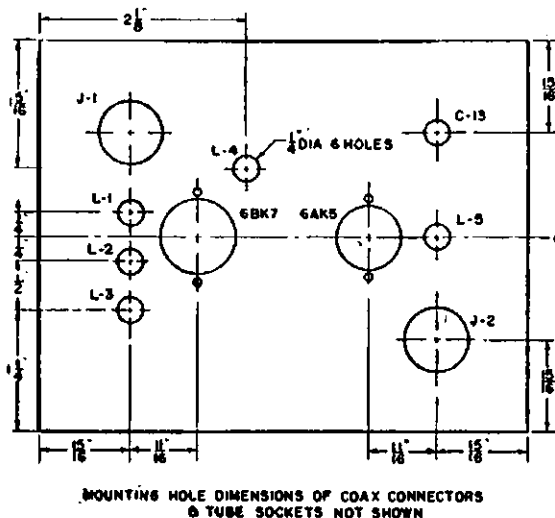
Panel layout of the S/N-6 Pre-Amplifier (back elevation).
